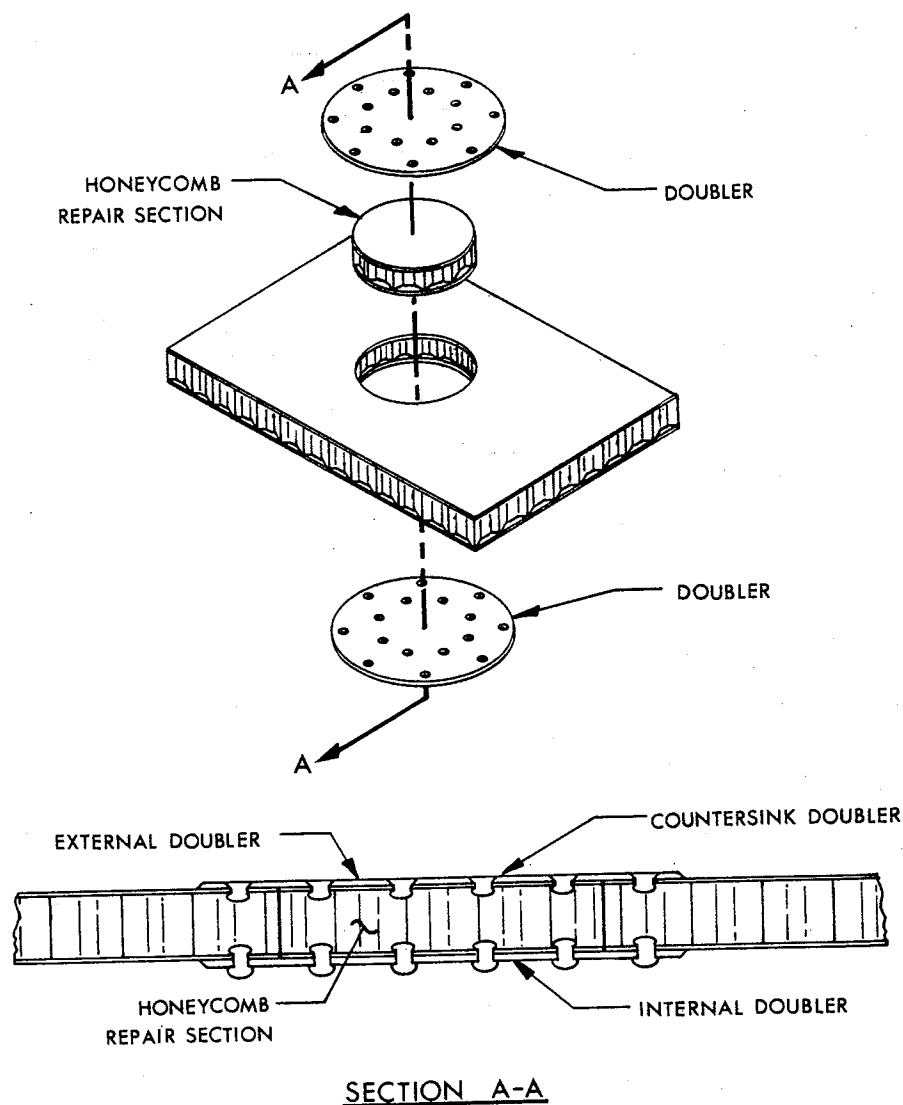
Honeycomb Repair, External Doubler (Riveted)
